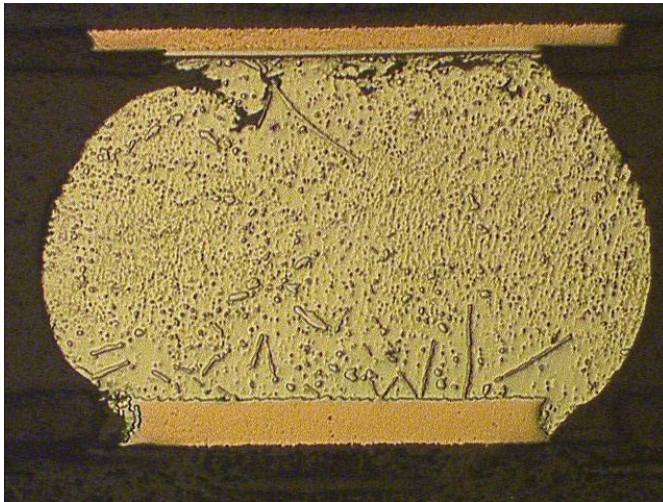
PBGA-225 Solder Joints, Board 49, Component U6, SAC305/SAC405, Failed @ 2763 Cycles
